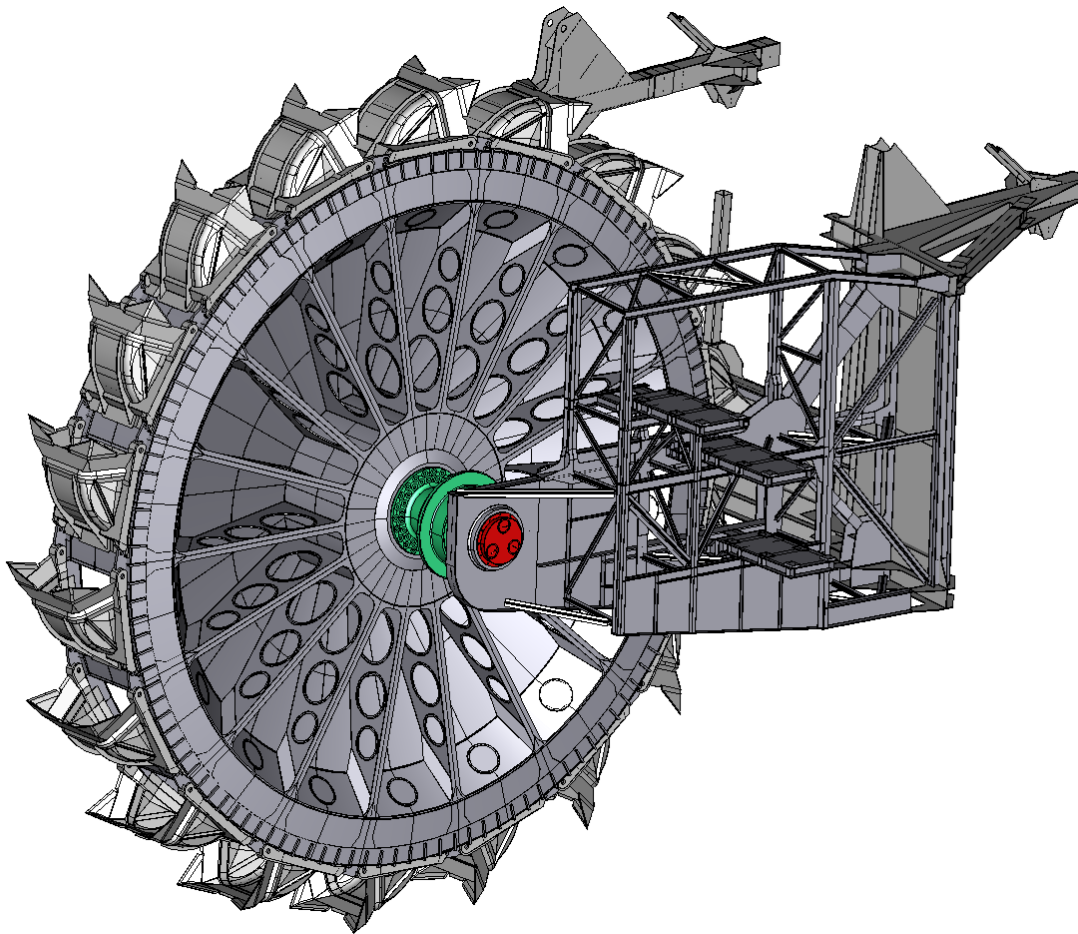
1. New excavation unit of bucket wheel excavator SchRs4600
